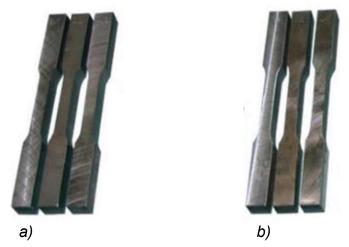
Real appearance of the specimen for the tensile test: BM a); welded joint b)
